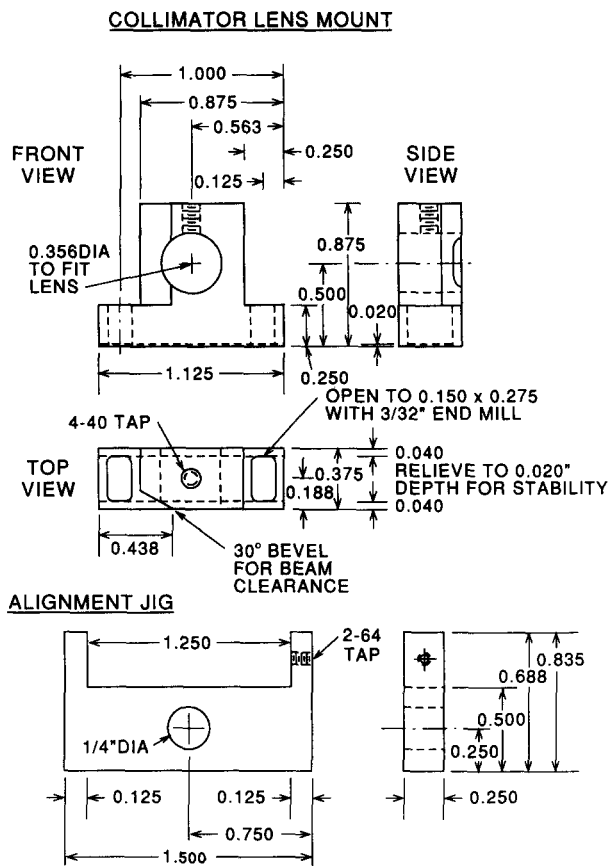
Collimating lens mount and alignment jig machine drawing. Dimensions are in inches.
